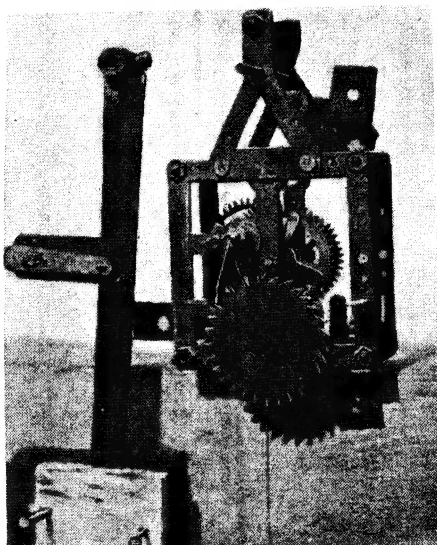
Plain Drum Clock with Gravity Arm Removed
